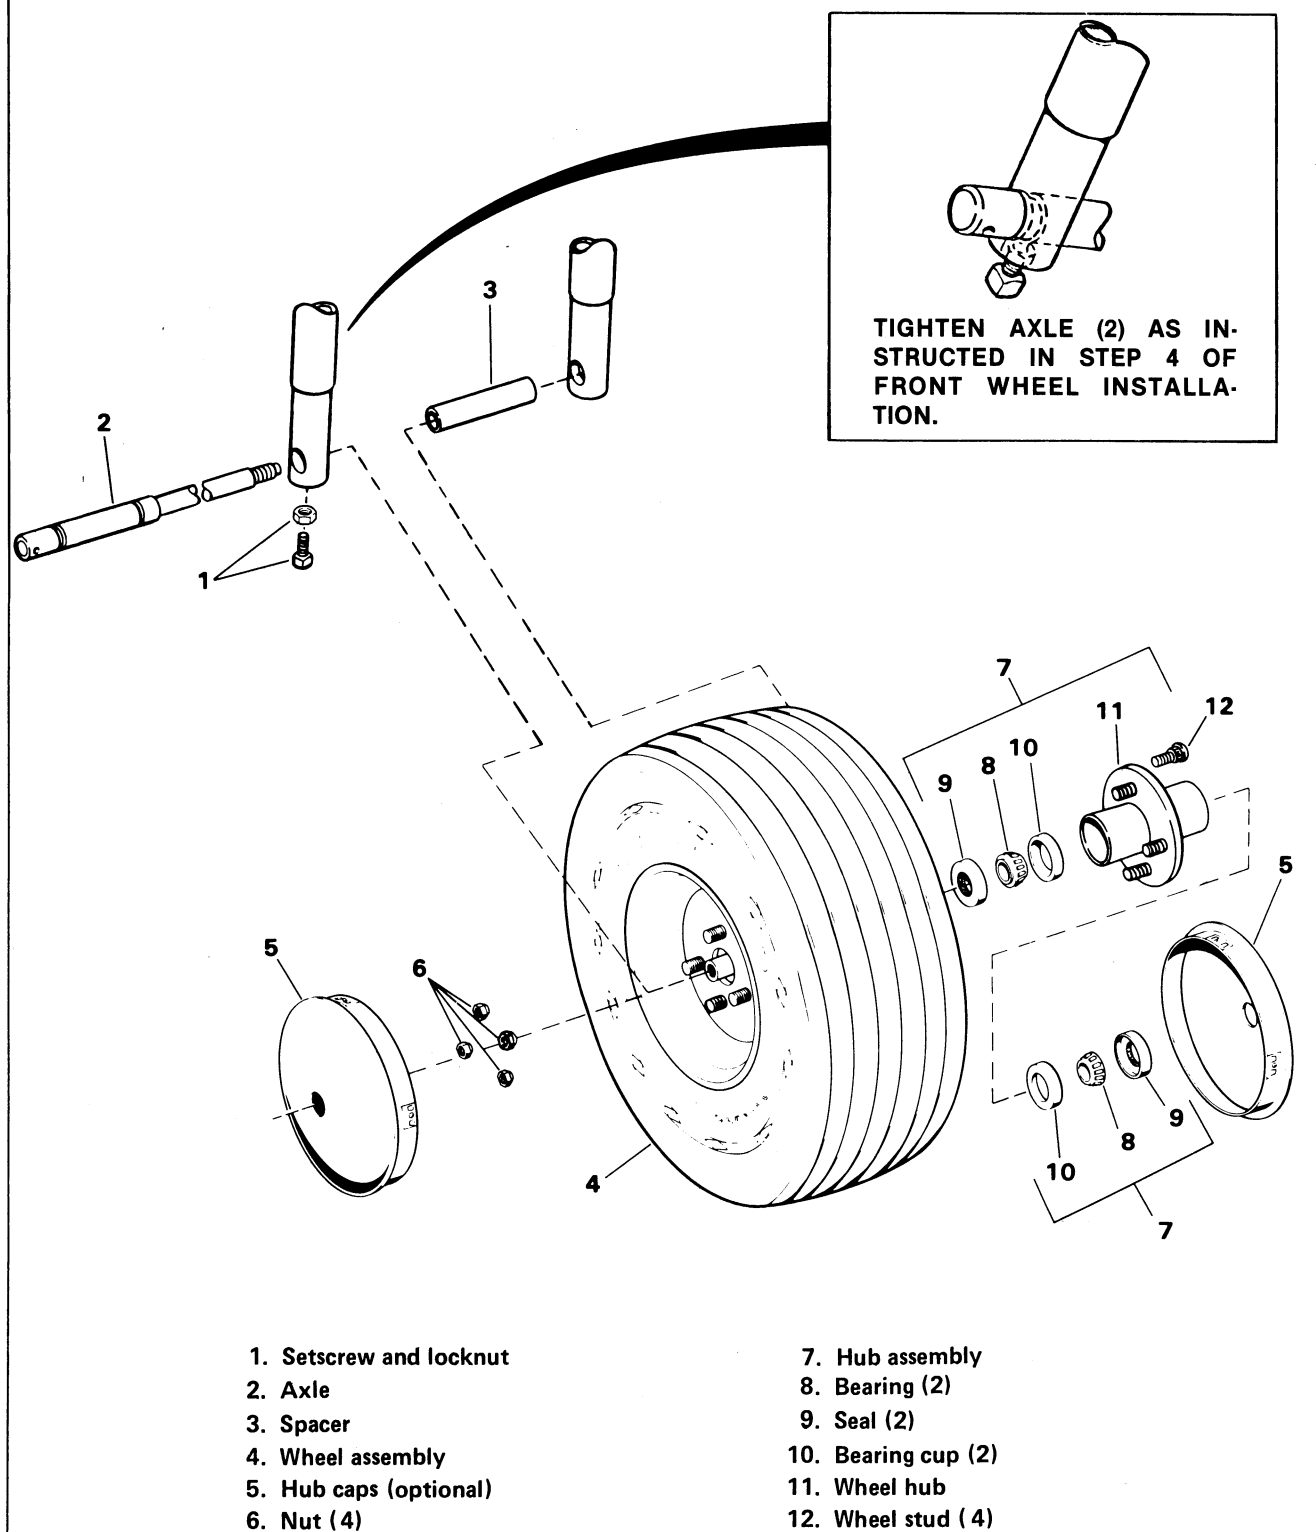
D3 Front Wheel and Hub — Exploded View
